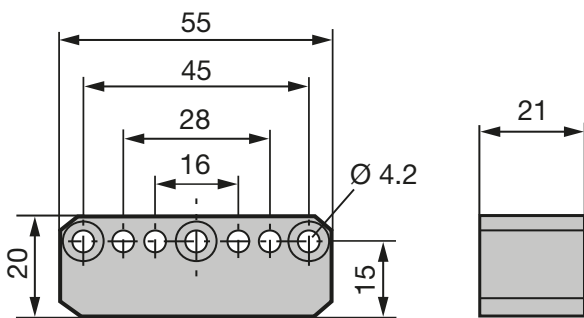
Installation dimensions of BTL5-P-5500-2 magnet
